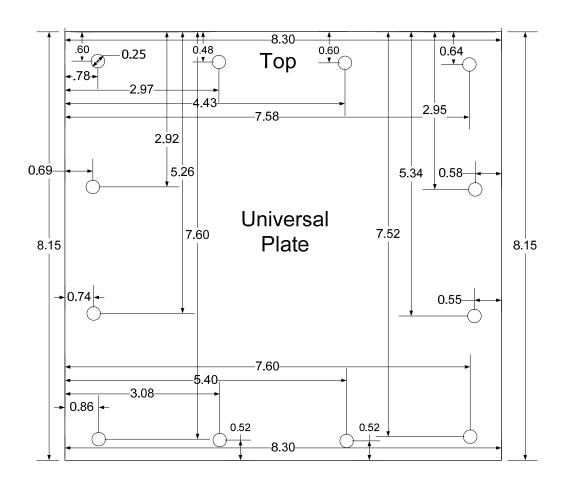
Room 23M Universal Plate Dimensions (Plate #2)
